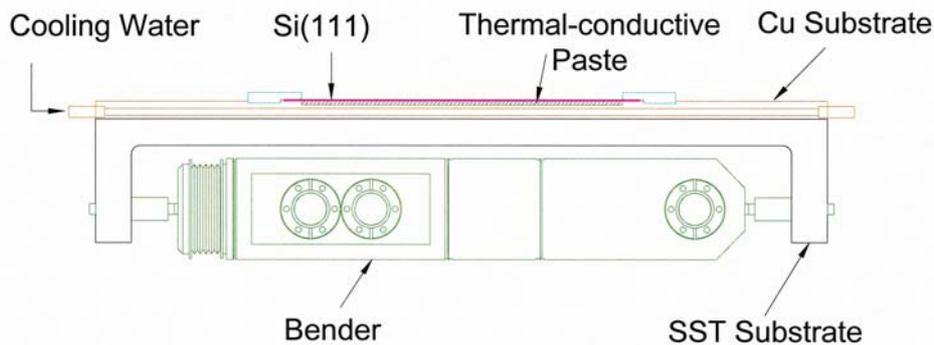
Schematic drawing of the bending and cooling mechanisms of ACCM.
